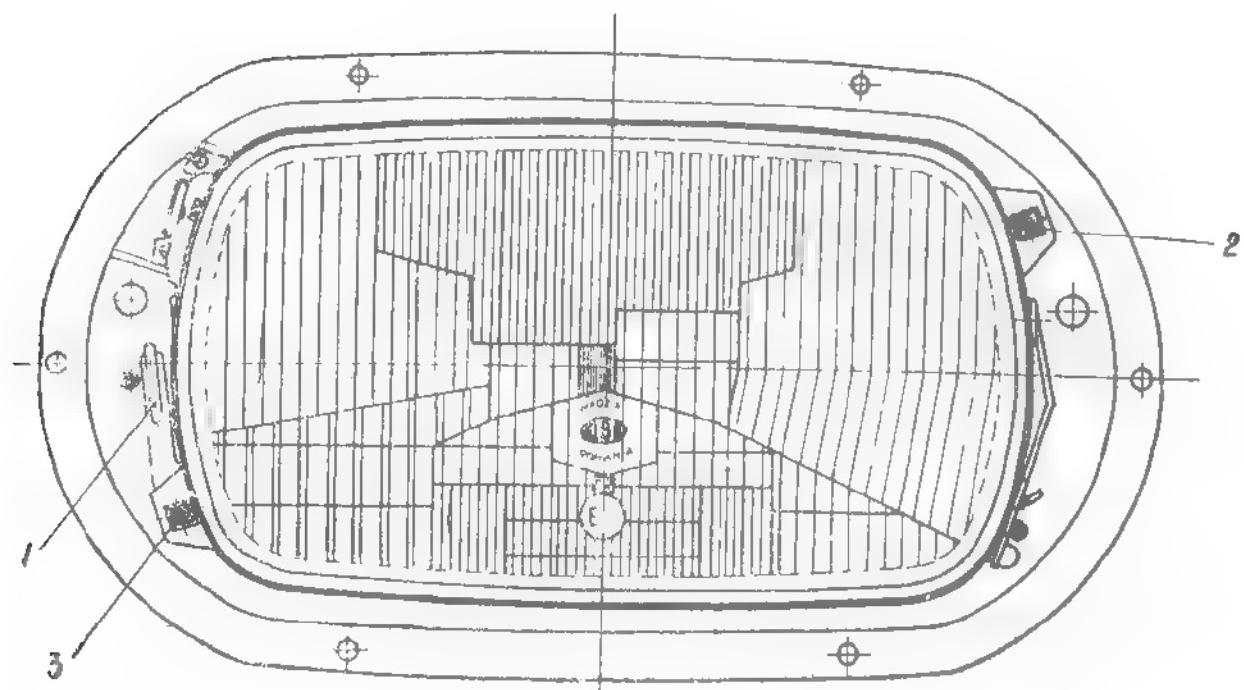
F E R RECTANGULAR HEADLAMP
